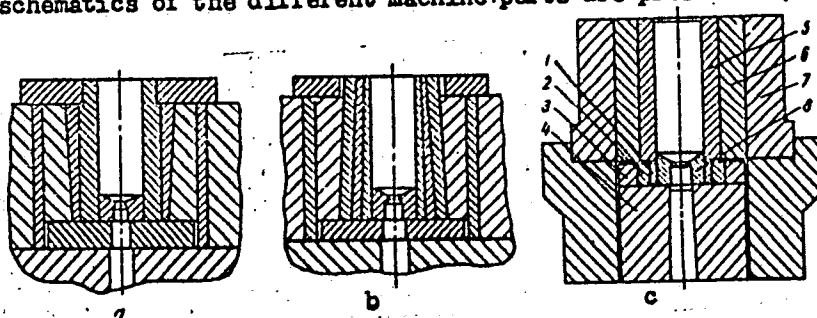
Die assembly for pressing of pipes of 10 x 1 mm diameter. a - scheme I; b - scheme II; c - scheme III; 1, 2, 3, die rings I, II, III; 4 - washer, 5 container bushing; 7 - yoke; 8 - die, 6 - bushing.
